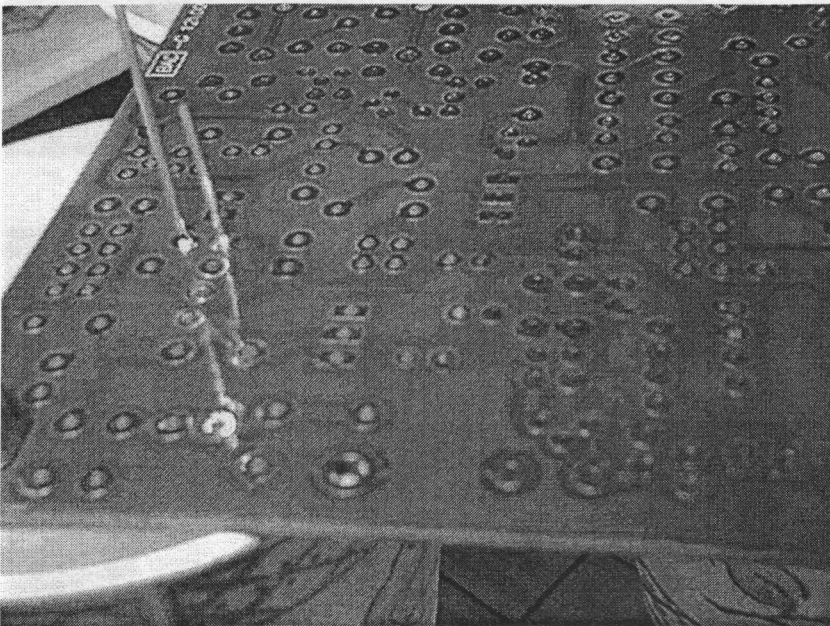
Diode D13 bottom side of the PC board after being soldered.
